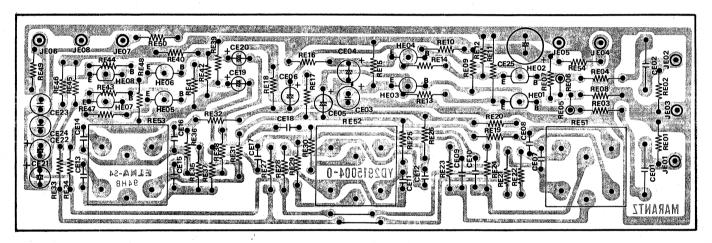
Pre and Tone Amplifier Board — PE01 Component Assembly Diagram
